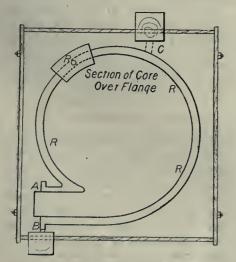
PLAN VIEW OF CLOSED MOULD.
